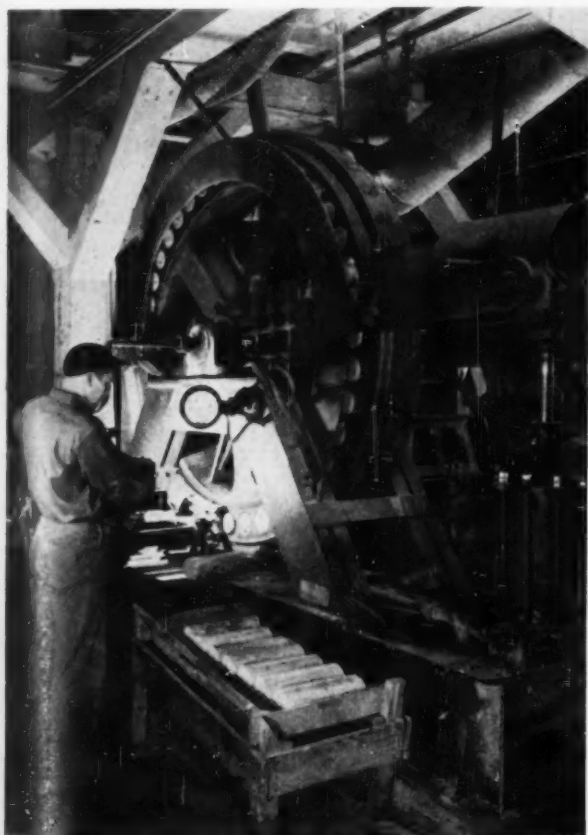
DISCHARGE END OF A PRES-TO-LOG MACHINE
